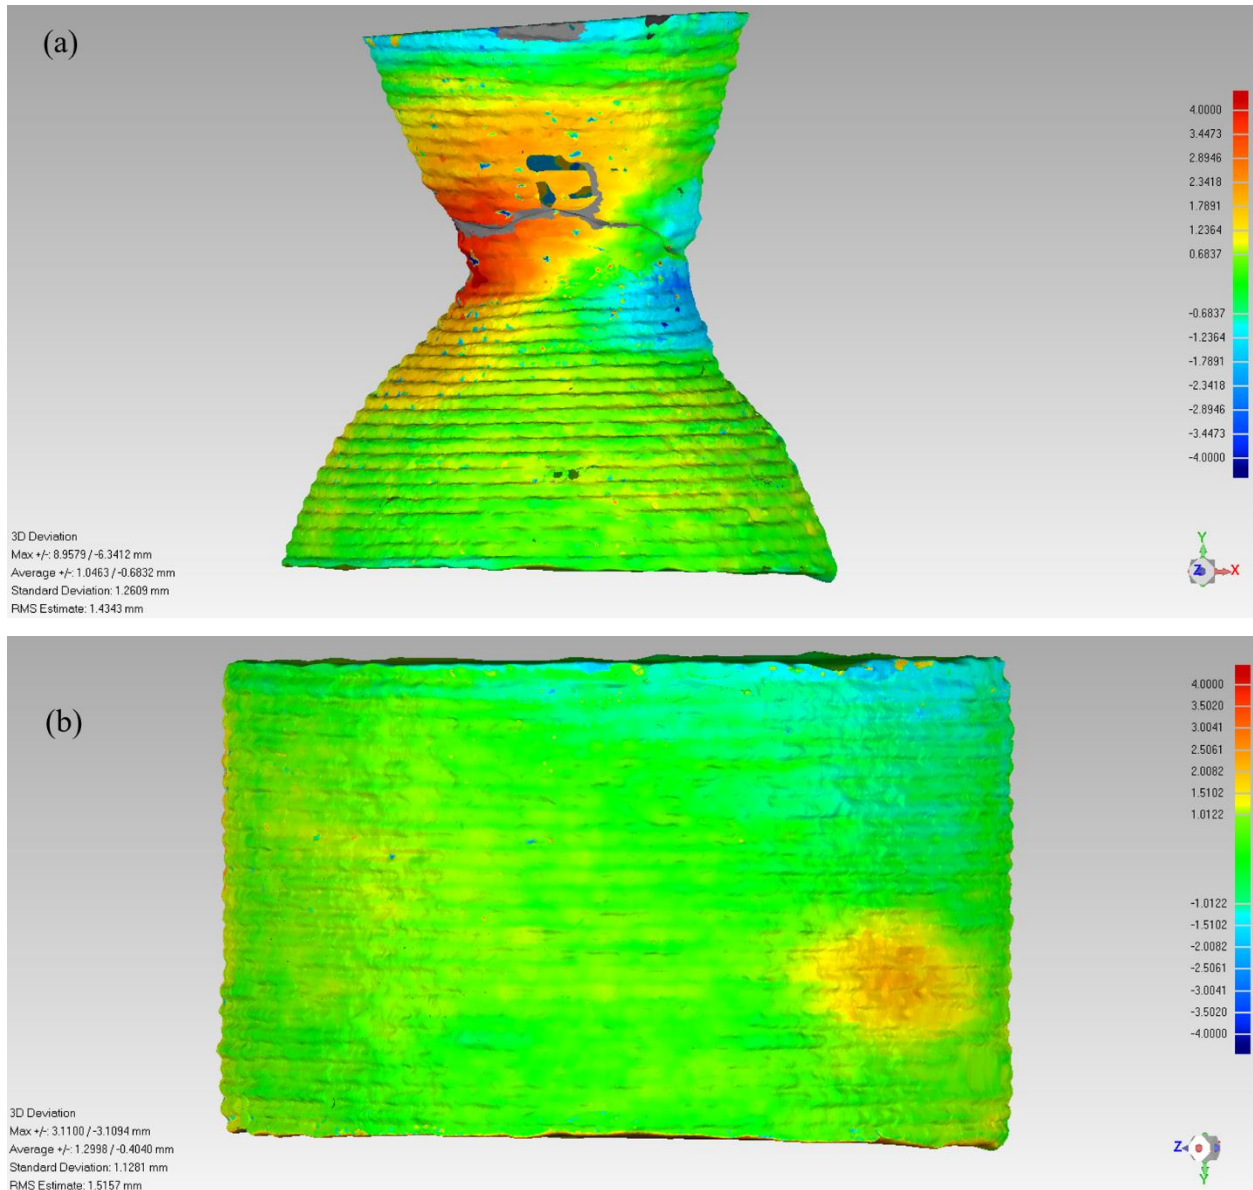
Deviation analysis results in millimeters for the outer surfaces of the nozzle (a) and cylinder (b) test pieces.
